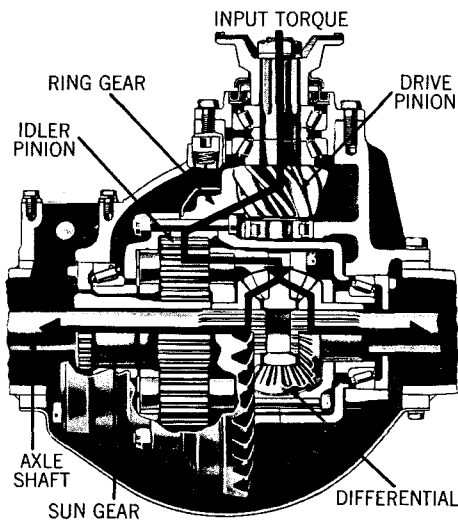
Power Flow Through Planetary Double Reduction Axle
